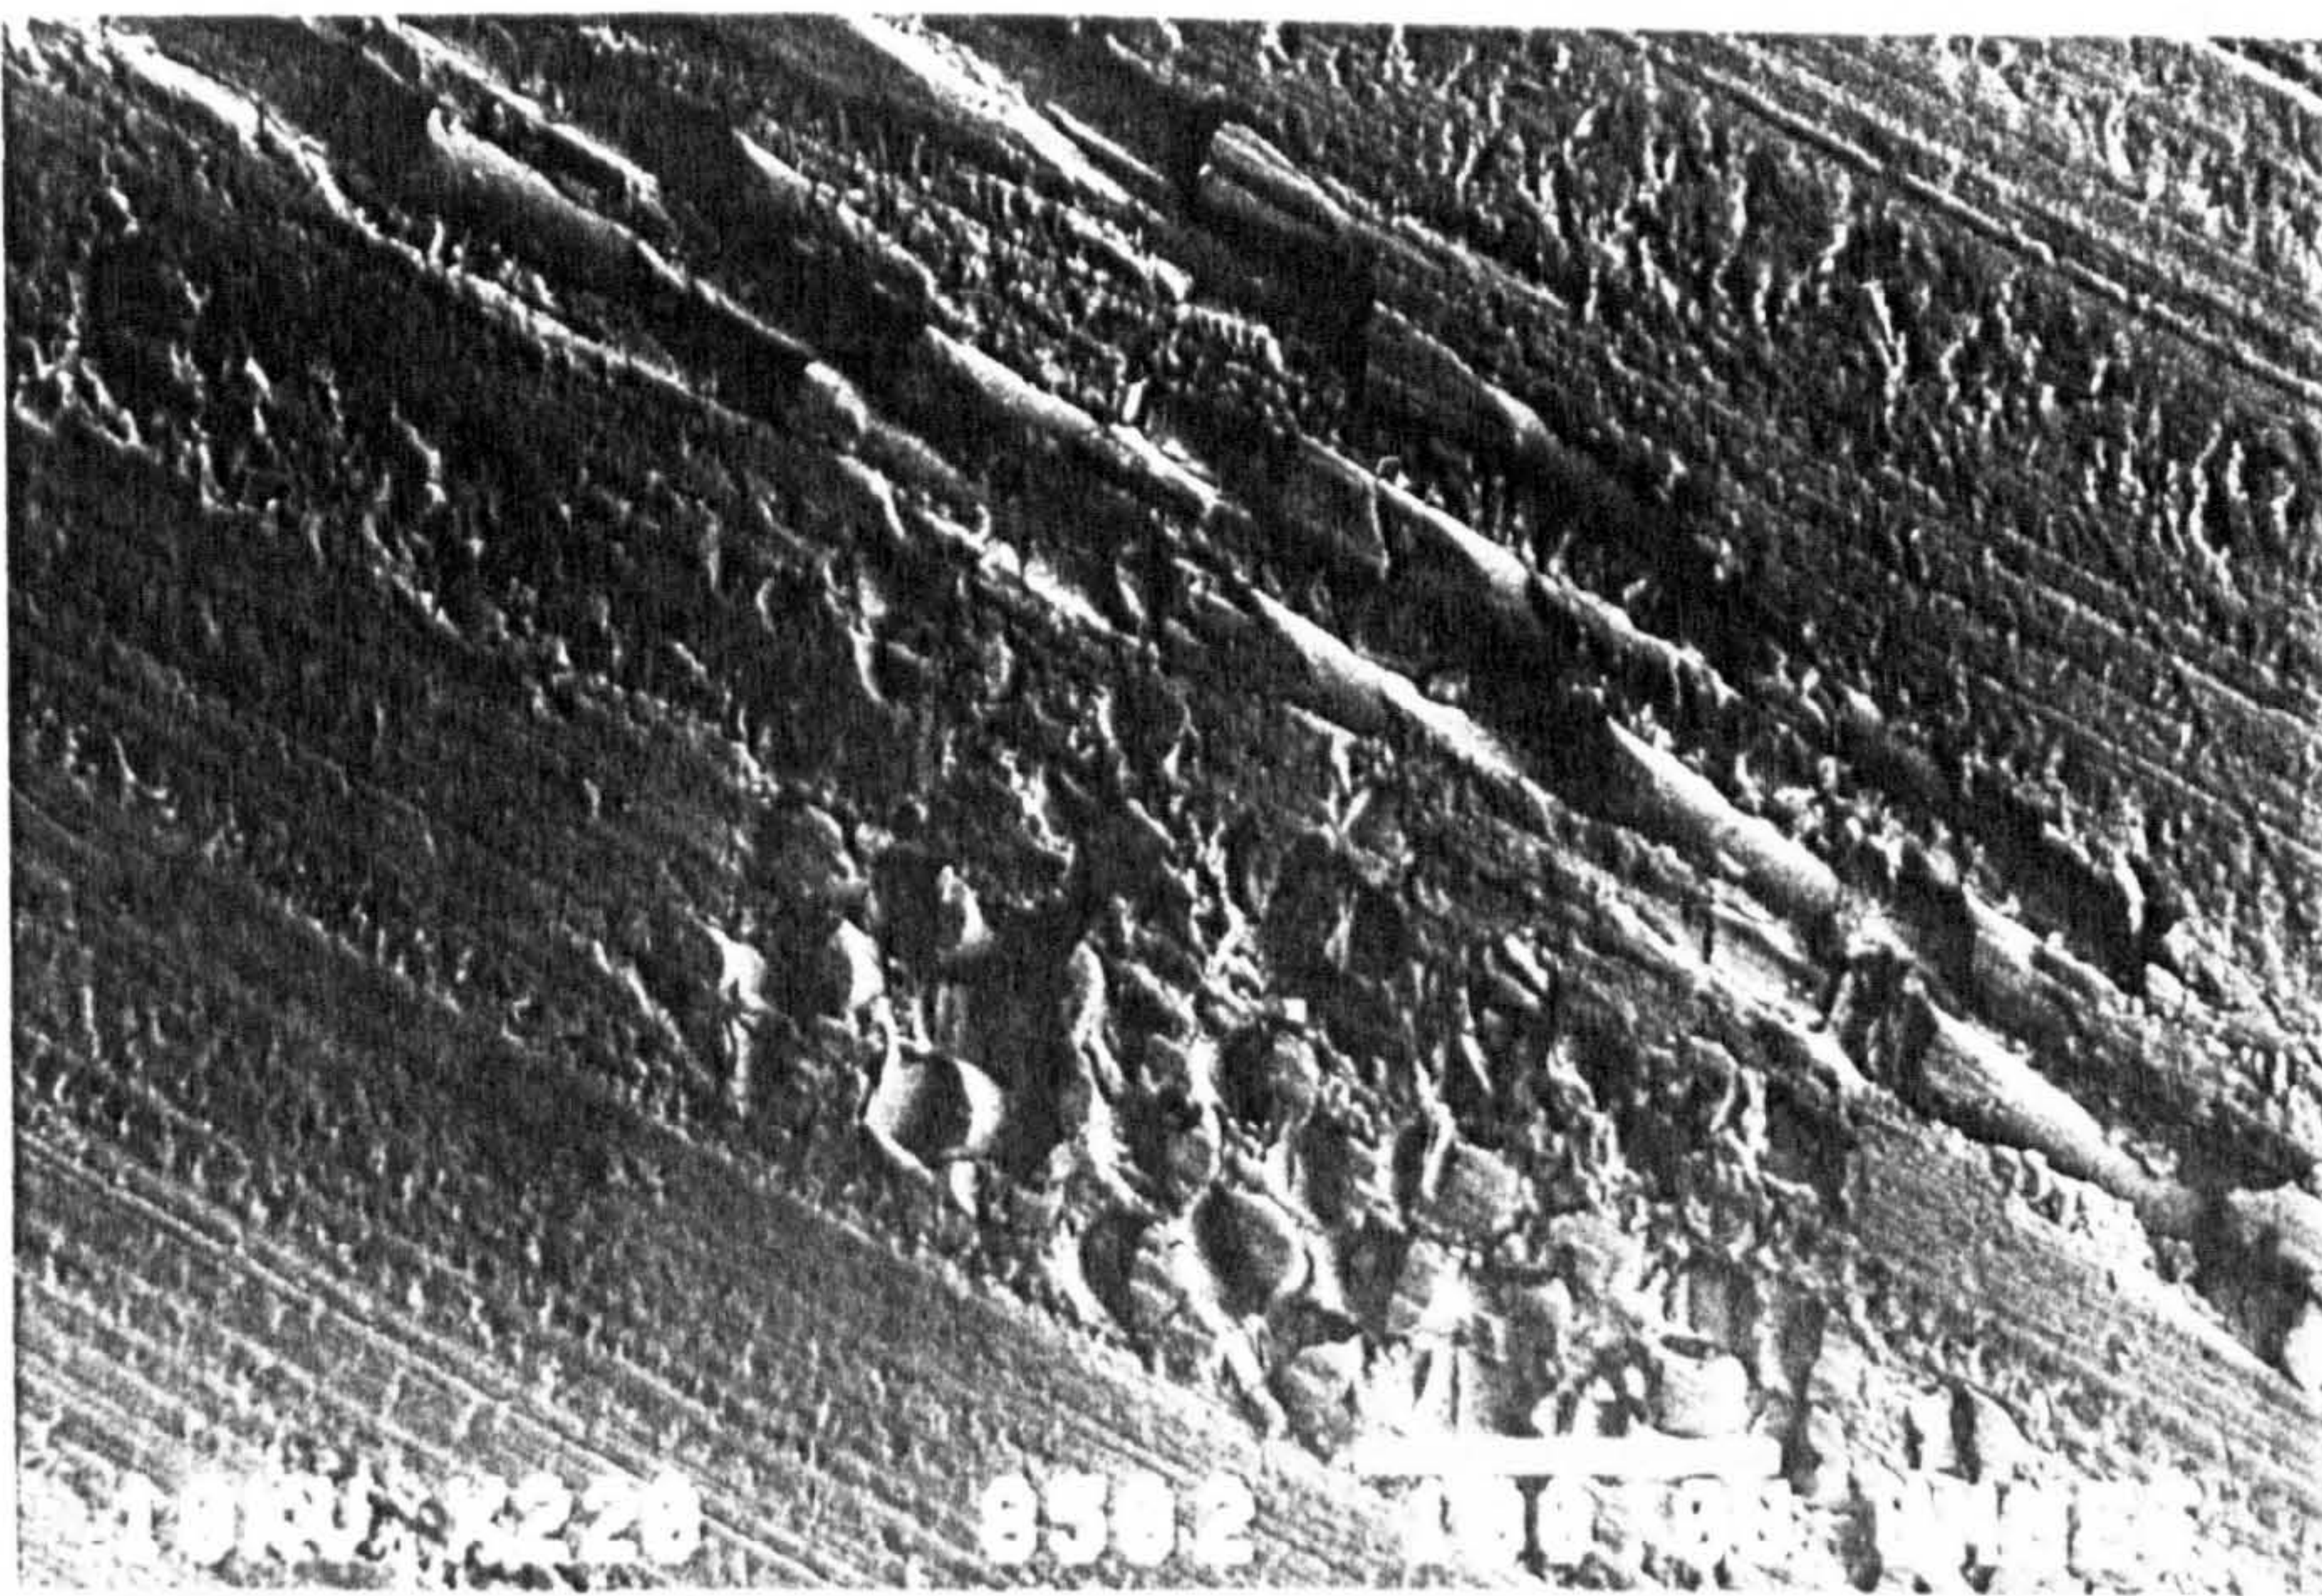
The surface of a polyester CFRM reinforced moulding sectioning and polishing using an abrasive surface grinding wheel (grain size 80).
